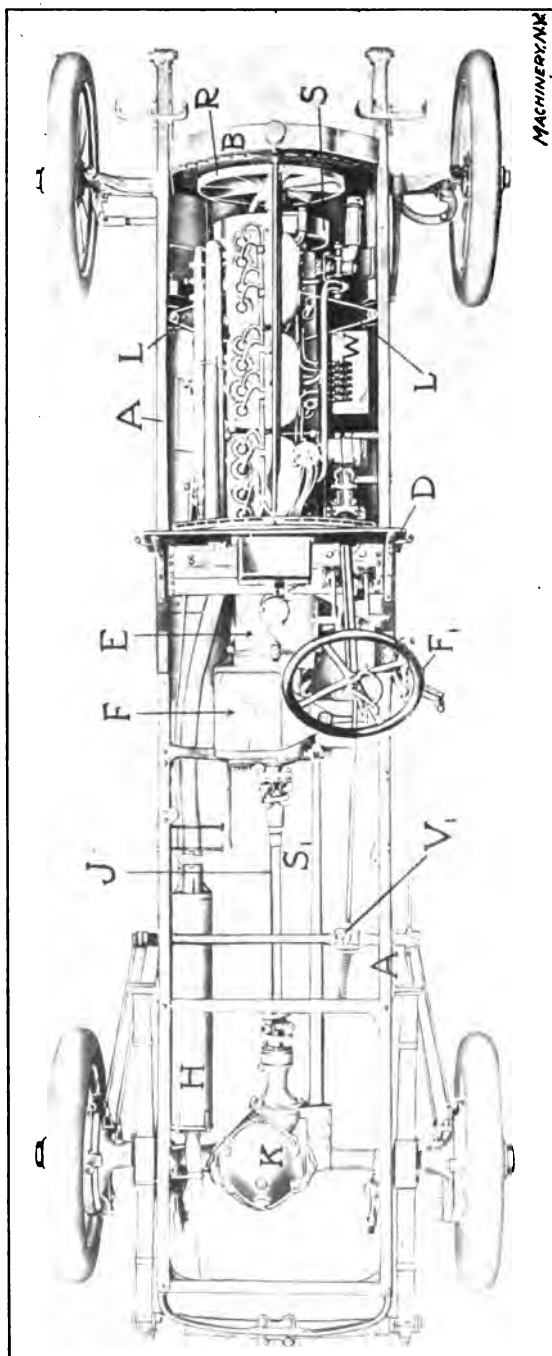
Top View of Chassis, showing Arrangement of the Mechanism
